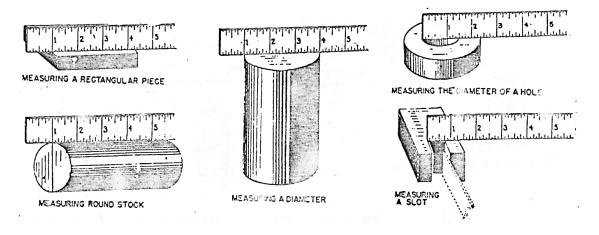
MAKING LINEAR MEASUREMENTS.
